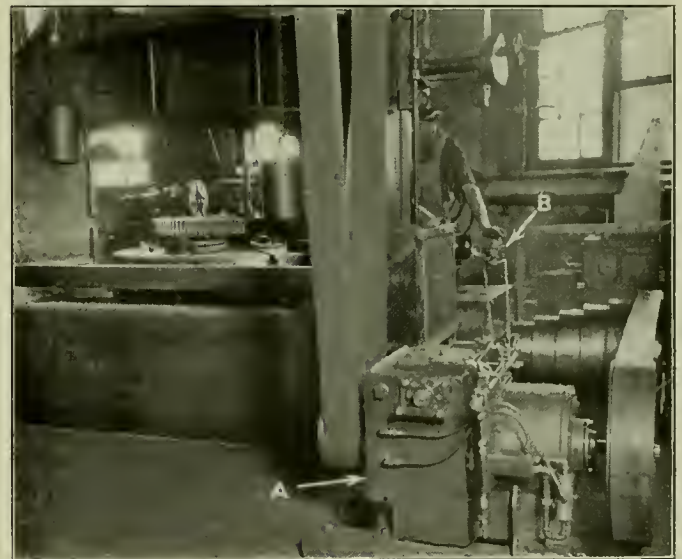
Rear View of 7-Ft. Boring Mill Equipped with Oilgear Variable Speed Drive
